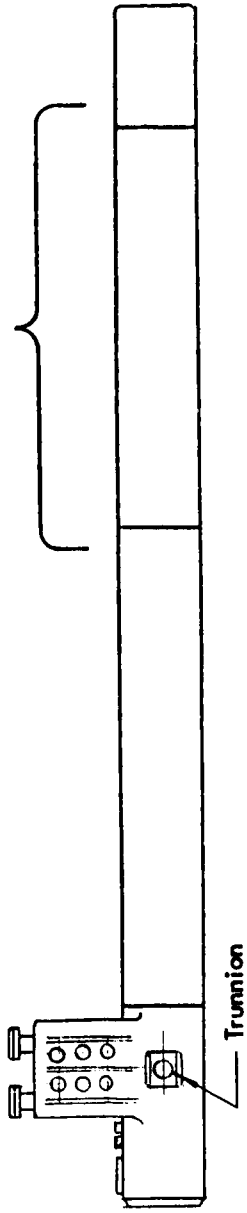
TENSILE TEST LOOP ASSEMBLY
